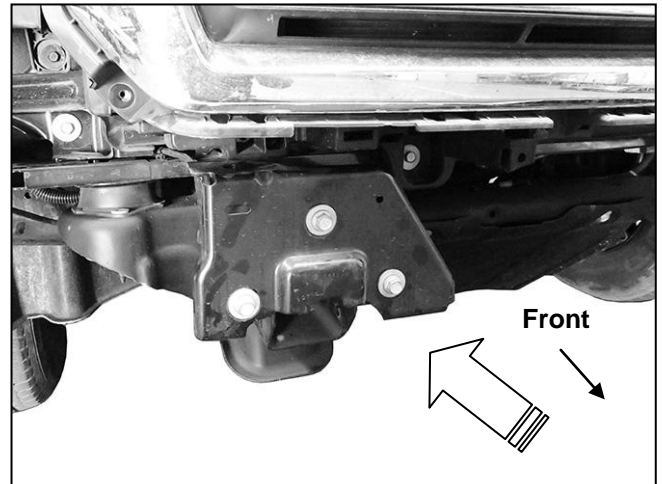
Remove plastic fascia panel to access hardware attaching bumper to top of bracket
